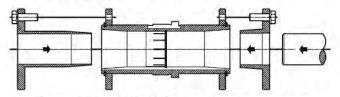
Short Shaft Bushing and Output Hub Assembly
